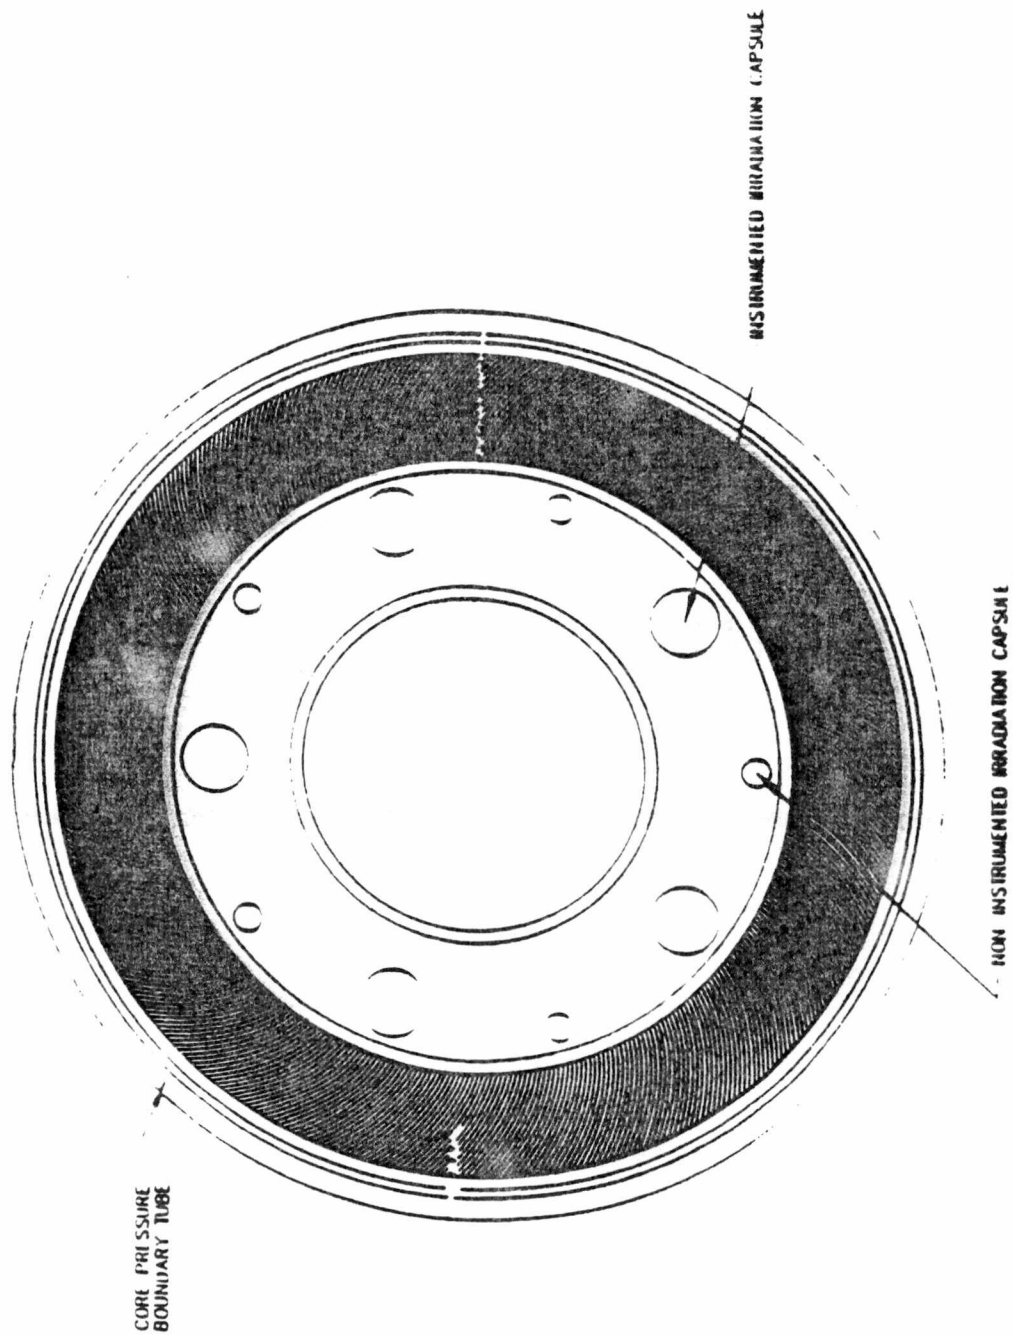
Involute Fuel Plate Design for the Upper Fuel Element¹²
